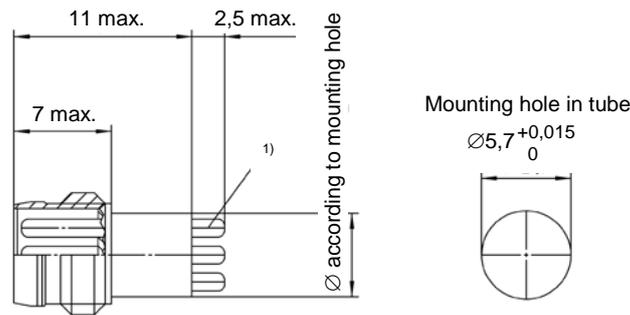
Tube insert, male contacts dip solder mounting, long version
